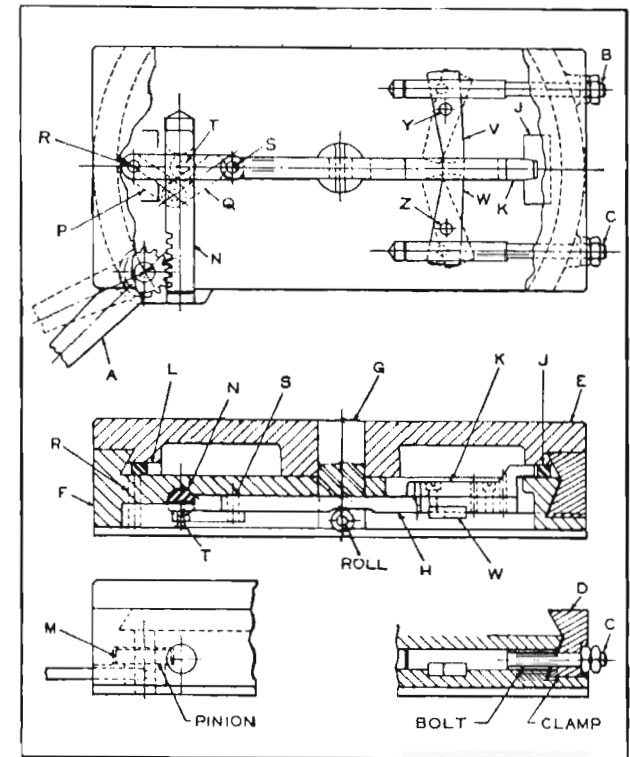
Mechanism for Operating a Locking Pin and Two Clamping Bolts in One Movement of a Hand Lever.
